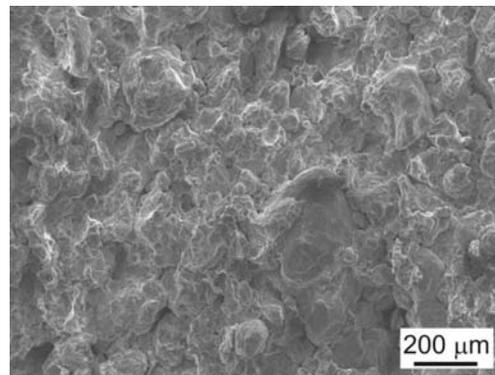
Fracture surface of specimens after pressing at 600 MPa and annealing at 500°C / 30 min.
